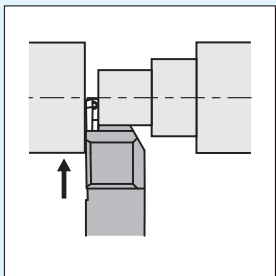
• Left-Hand holders are designed for Right-Hand machines
